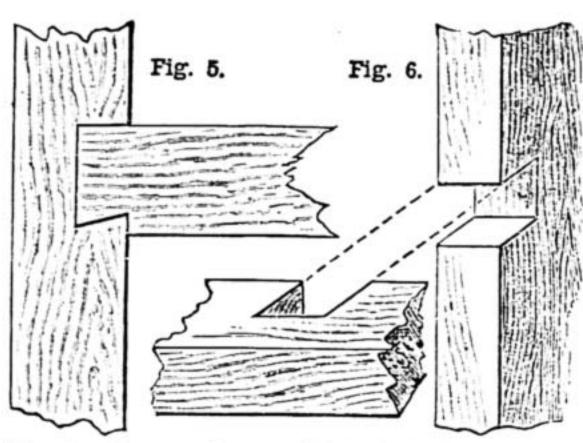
Drawer Bearer Joint to End. Fig. 6.— Halved Joint for Inner Ends and Bearer.
